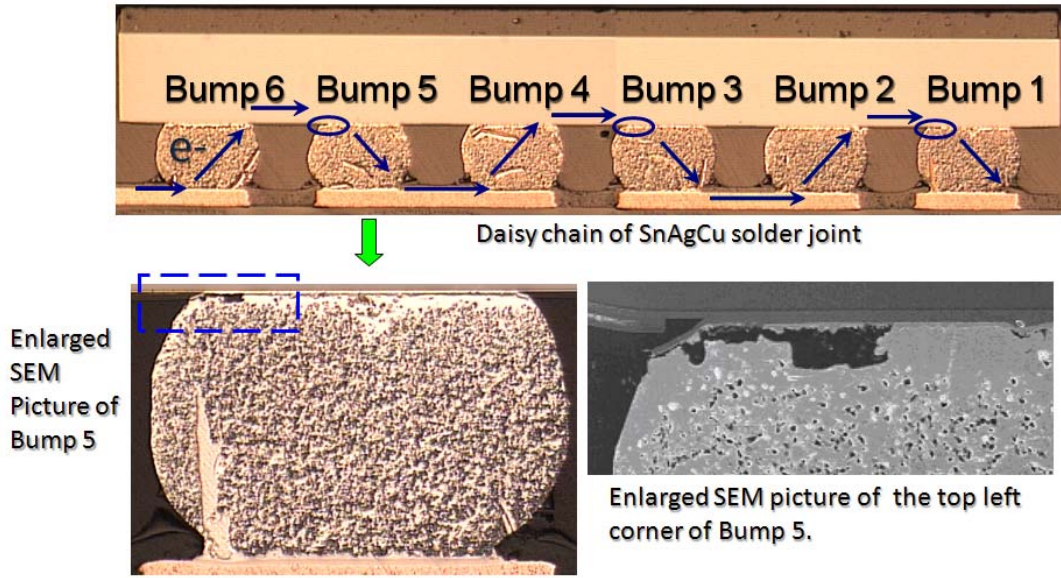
EM induced failure in flip-chip solder joints [6]
